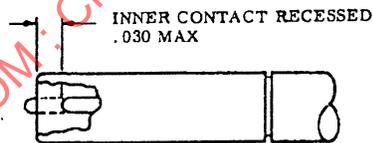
ASSEMBLY PROCEDURE. - CONTINUED
